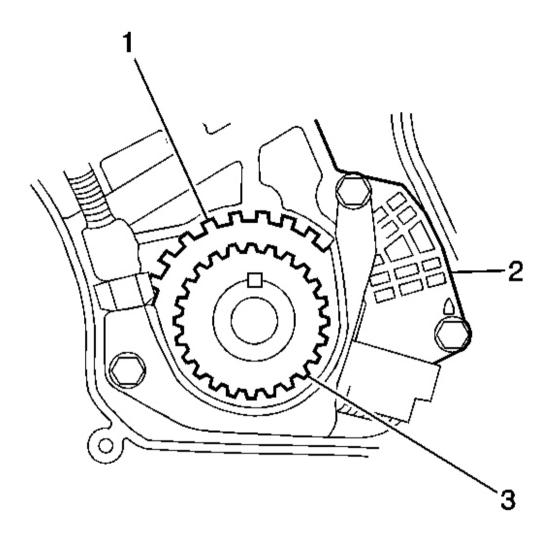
View Of CKP Sensor Signal Rotor Courtesy of GENERAL MOTORS CORP.
